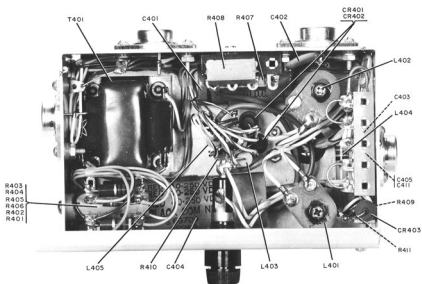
38-Volt DC Power Supply, Top View, Parts Location
